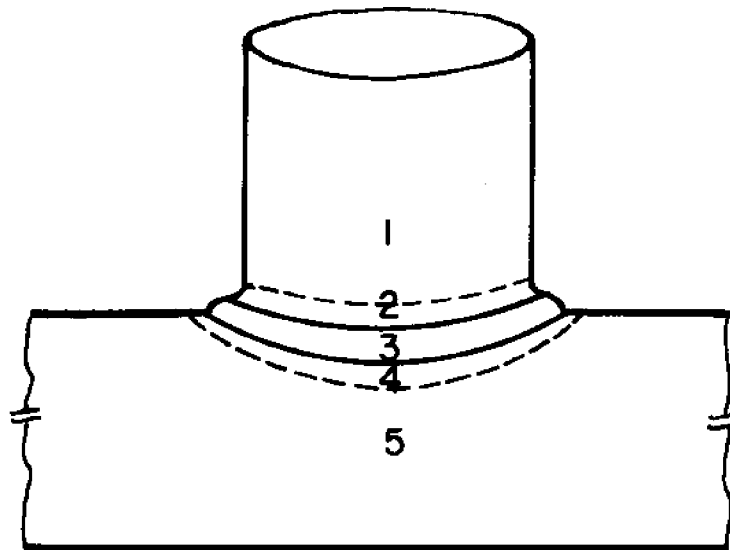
Arc stud welding setup used by Chiba [P19]
